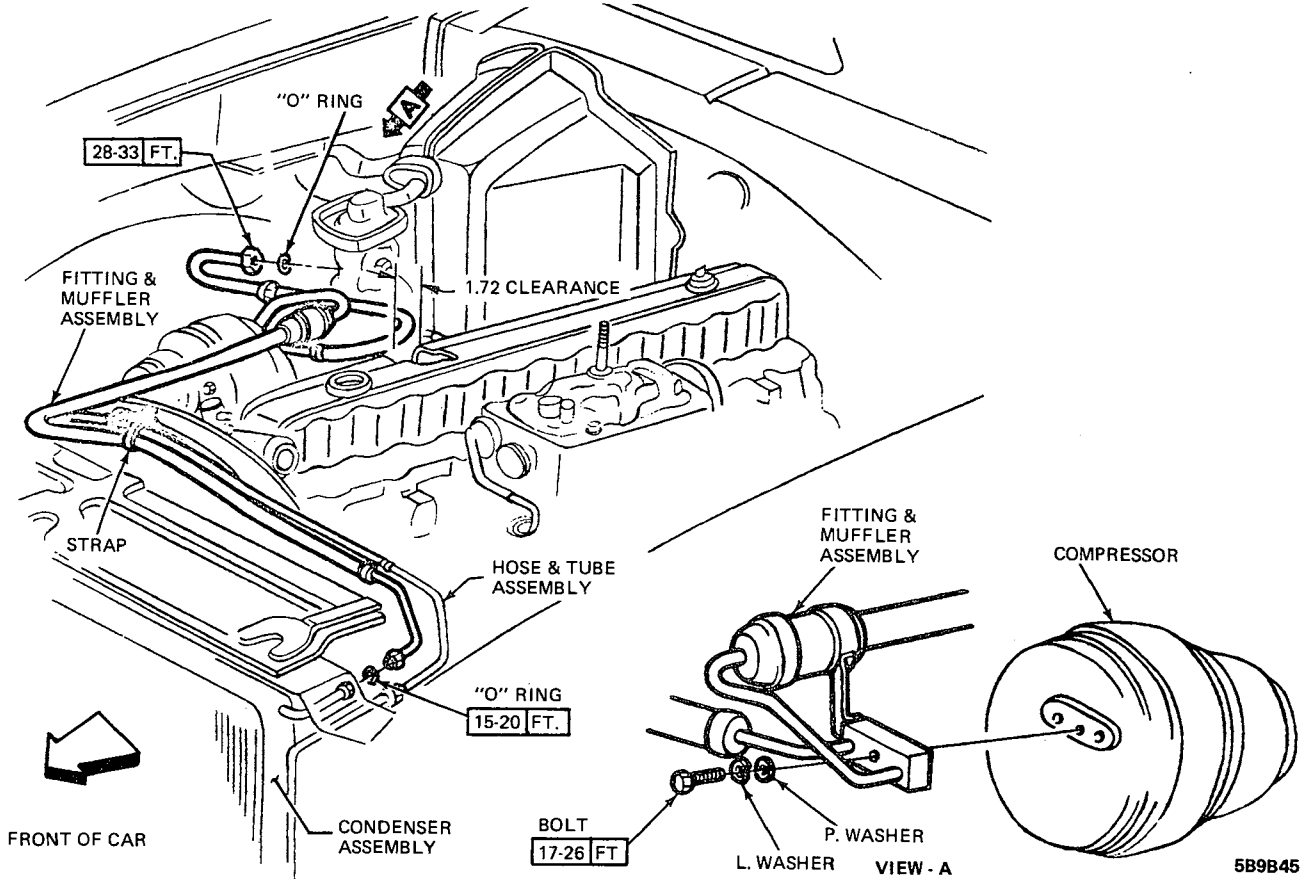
B-136 - Fitting and Muffler Assembly - L-6 250 Engine - X Series
